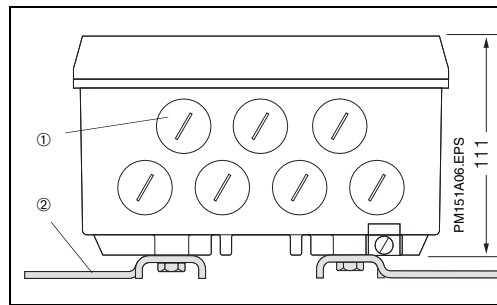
Bottom of field housing with brackets for wall mounting installed
